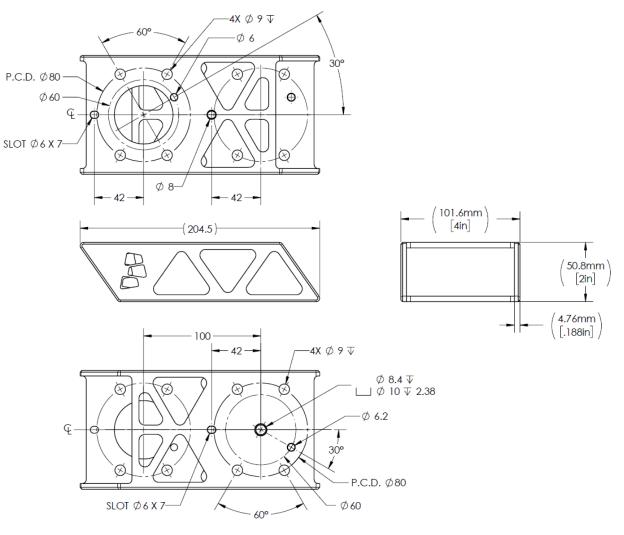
Technical Dimensions of the 100 mm Hollow Offset Link
